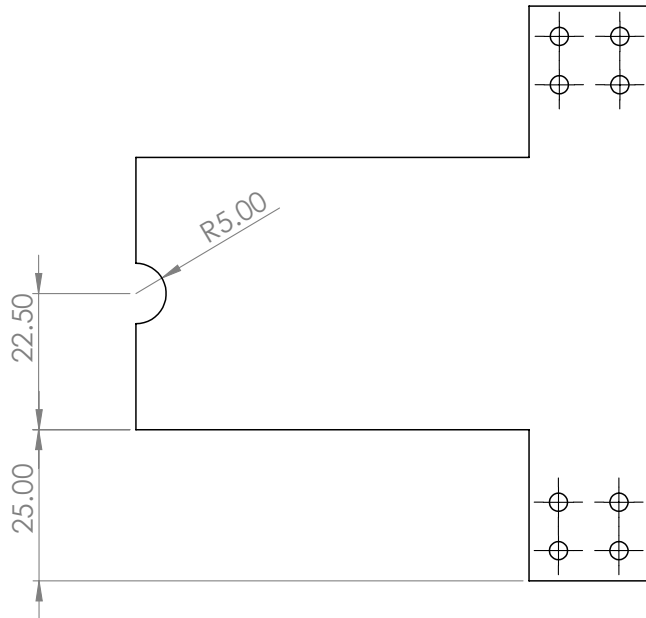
CAD Engineering drawing for type 316 steel manipulator arm extension.
